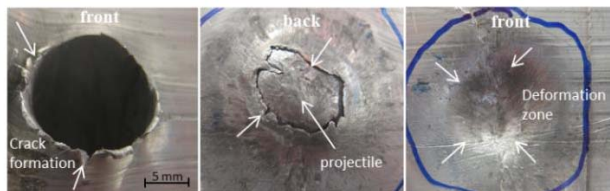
Macro picture of a sample shot with gunshot 7.62 × 51 mm with a G3 rifle placed side by side after extrusion
